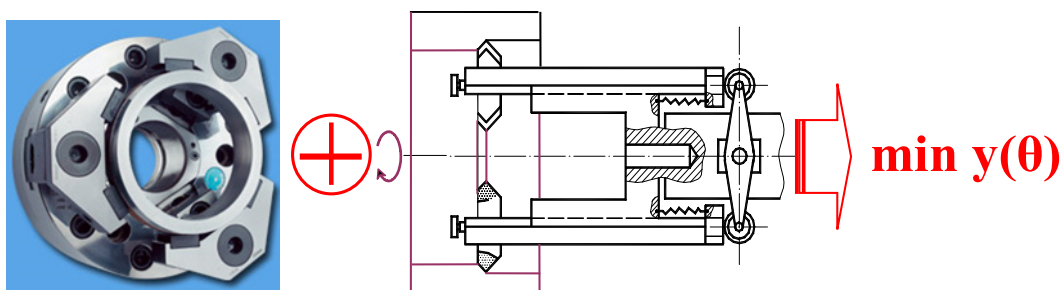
Complex manufacturing equipment for ring shaped work pieces machining
